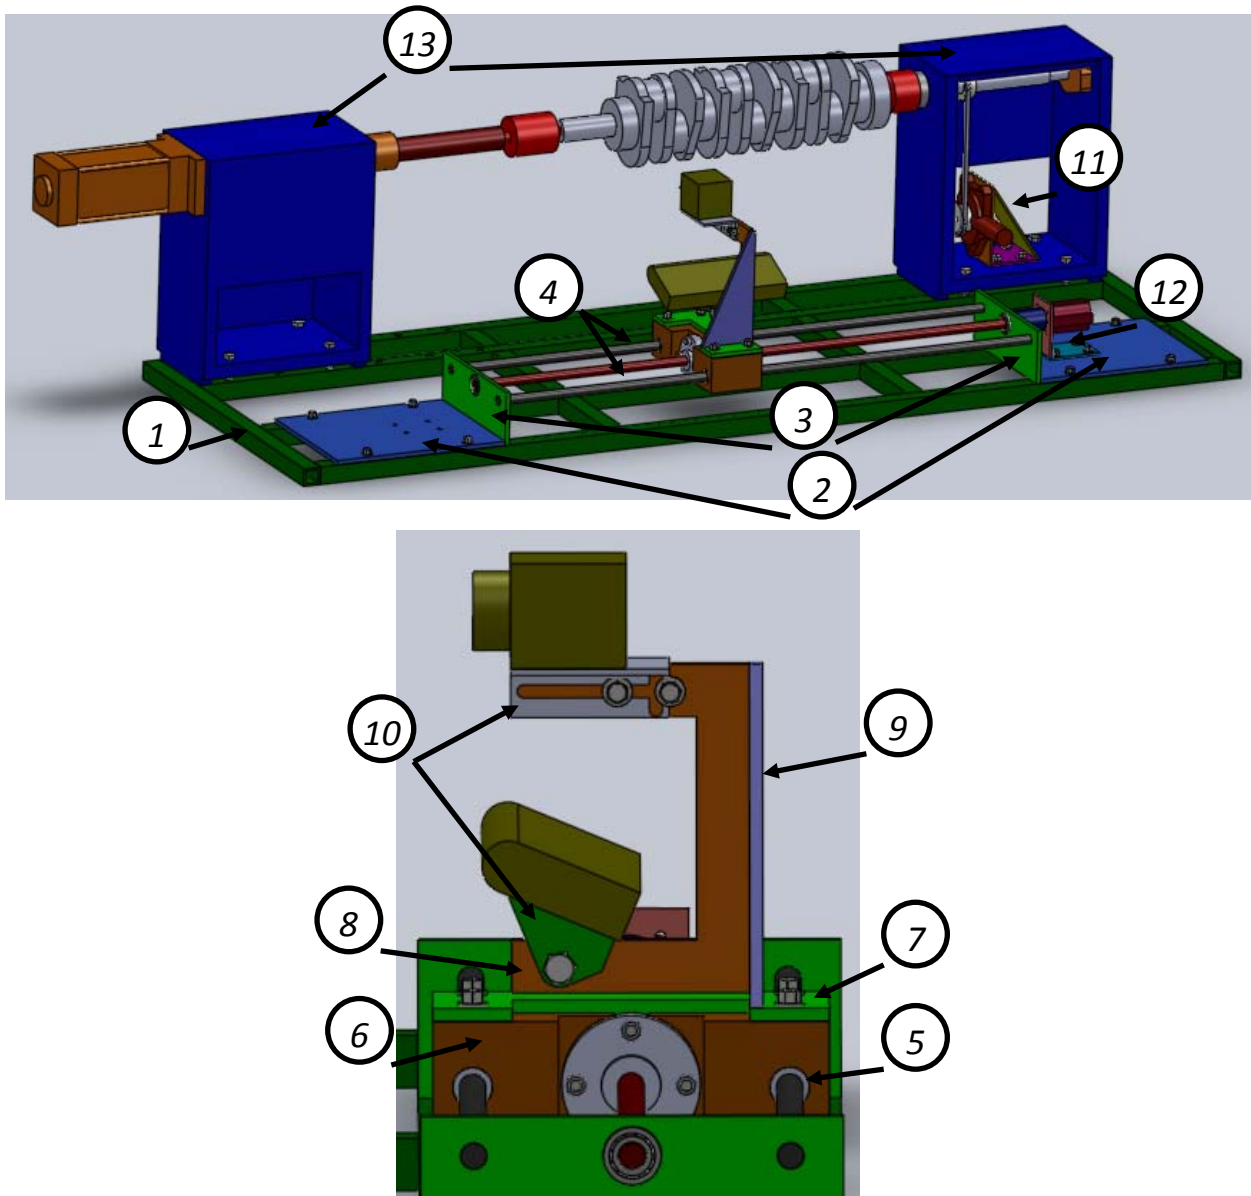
Top: Complete Isometric View showing components using raw materials. Bottom: Camera/Light Assembly showing components using raw materials.
